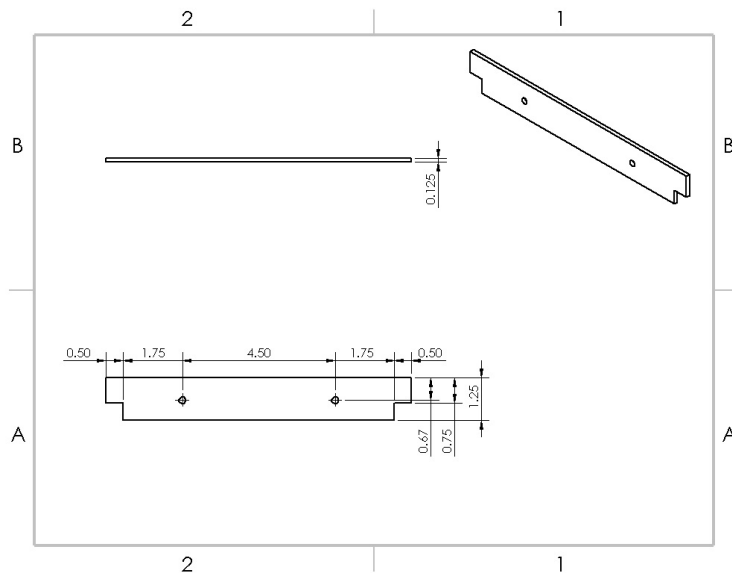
Dimensioned drawing of the runners connecting the centering rings.
